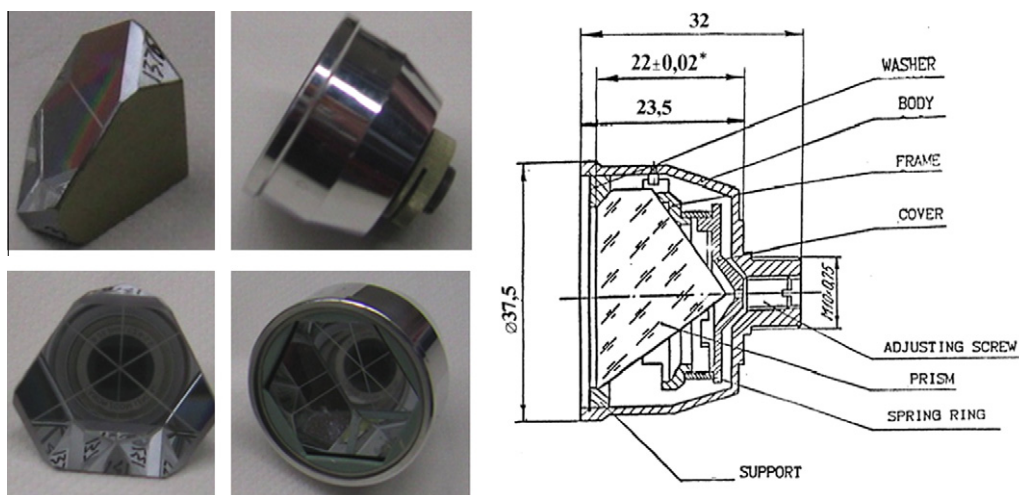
The GLONASS/GPS/GIOVE CCR: bare coated CCR (left); complete CCR, mounted in its aluminum housing (center); some details of the mounting scheme (right).
